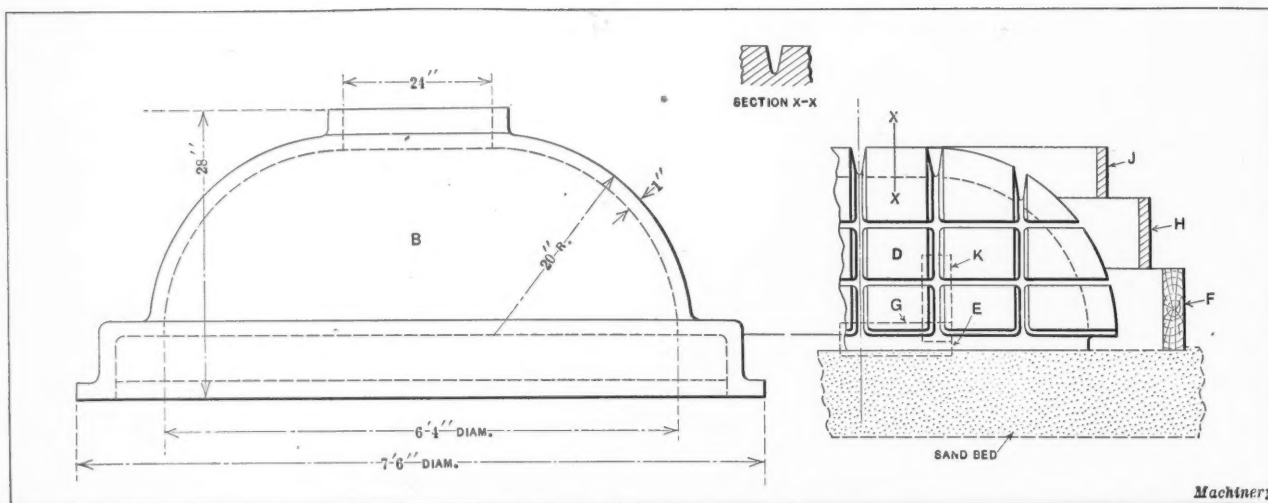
Tank-head Casting and Method of molding Arbor or Sand-bar for Cope
